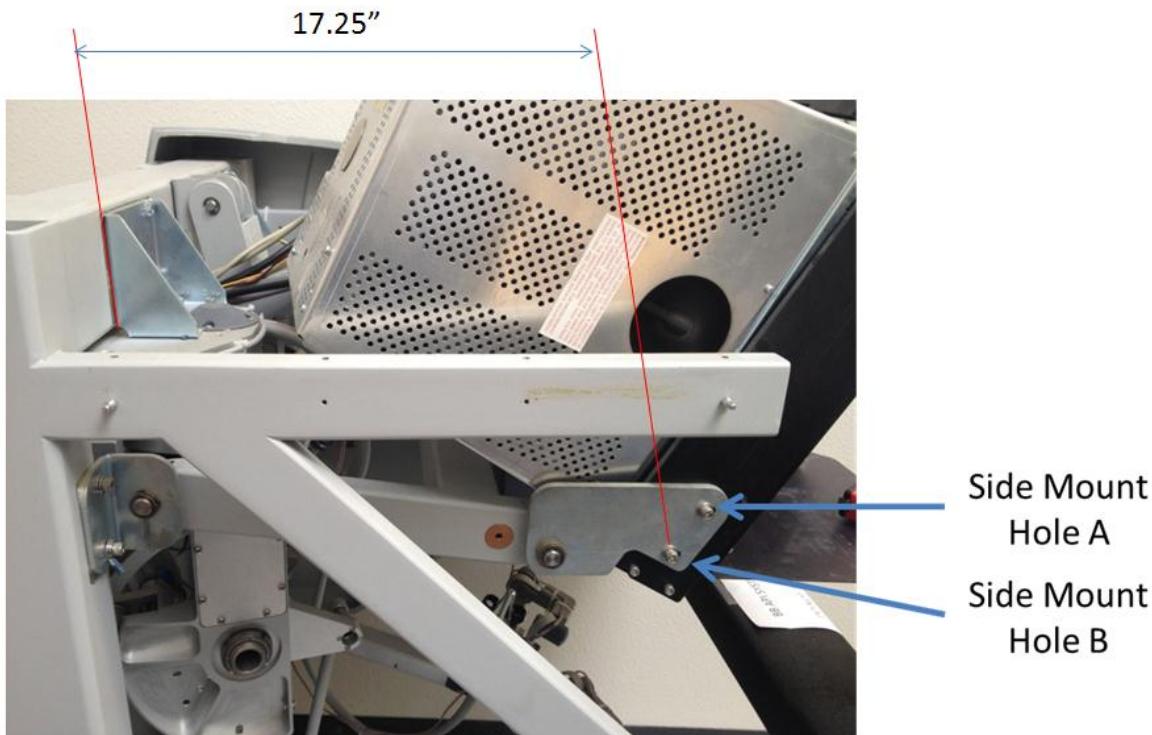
DISTANCE OF THE SIDE MOUNTING HOLES FROM MOUNTING PLATE OF MTMS.
